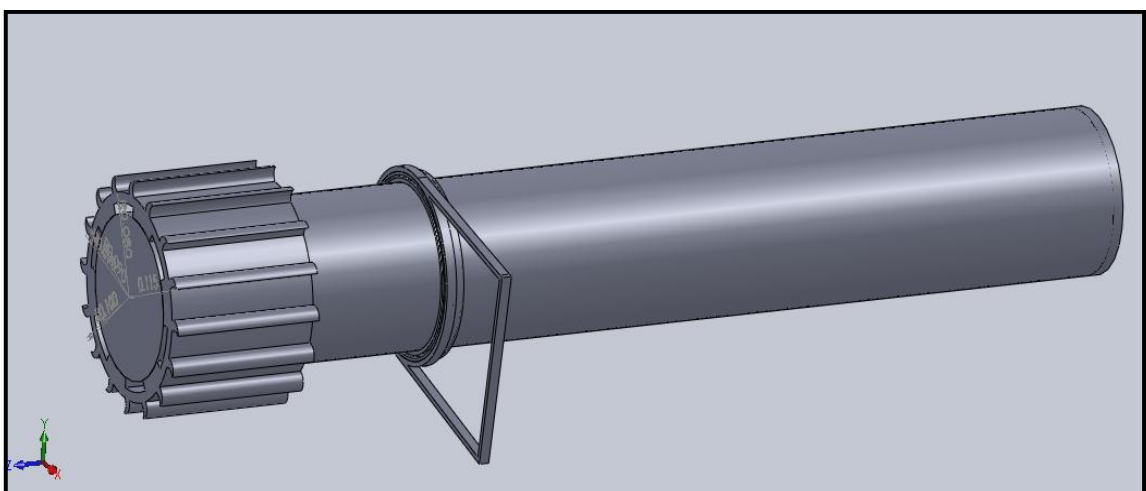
(e): Final assemble in SolidWorks design for Water turbine system
